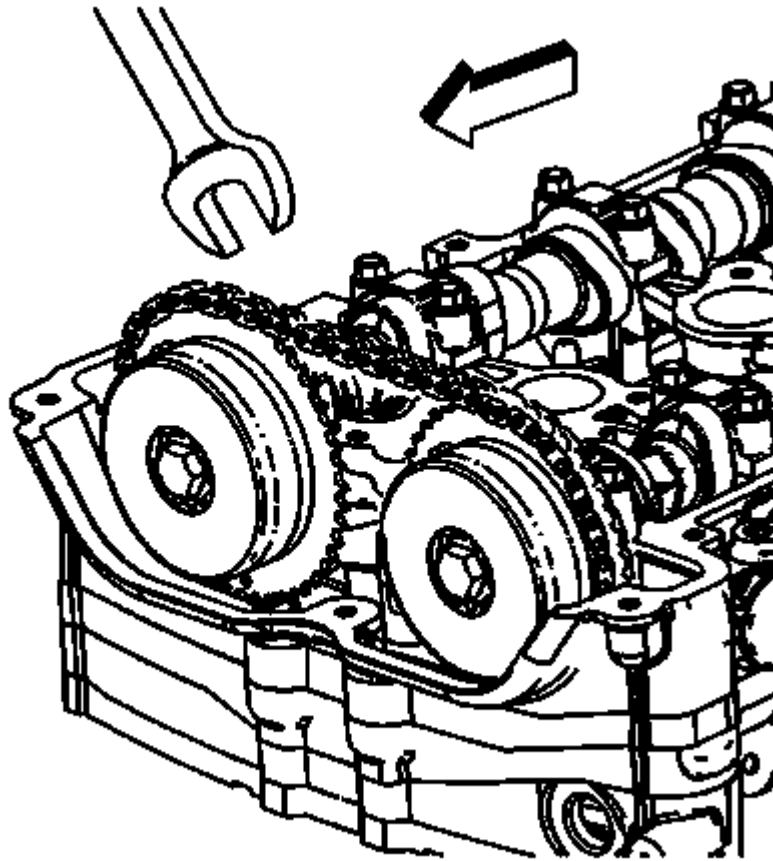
Identifying Cam Actuator, Camshaft & Chain
